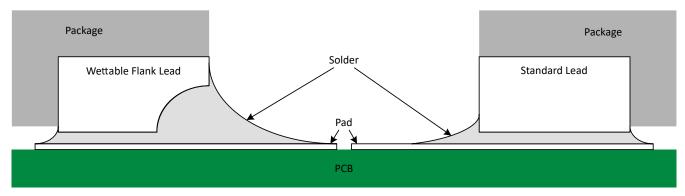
Simplified Cutaway View of Wettable-Flank QFN Package and Standard QFN Package After Soldering
